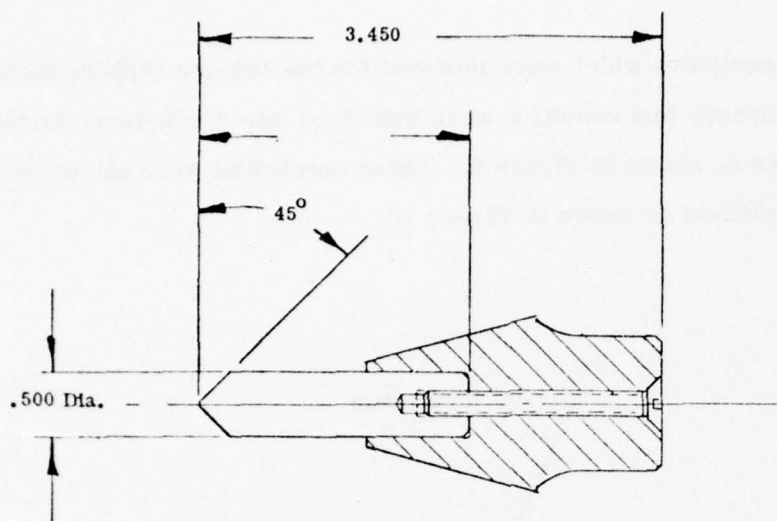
Non-Rotating Specimen Assembly (0.500-Inch Assembly)
